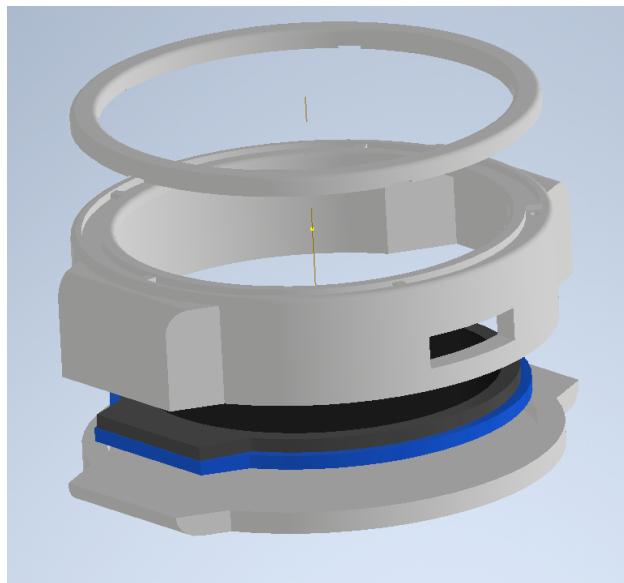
CAD Assembly of Touch Bezel, Display Case and TFT Display
